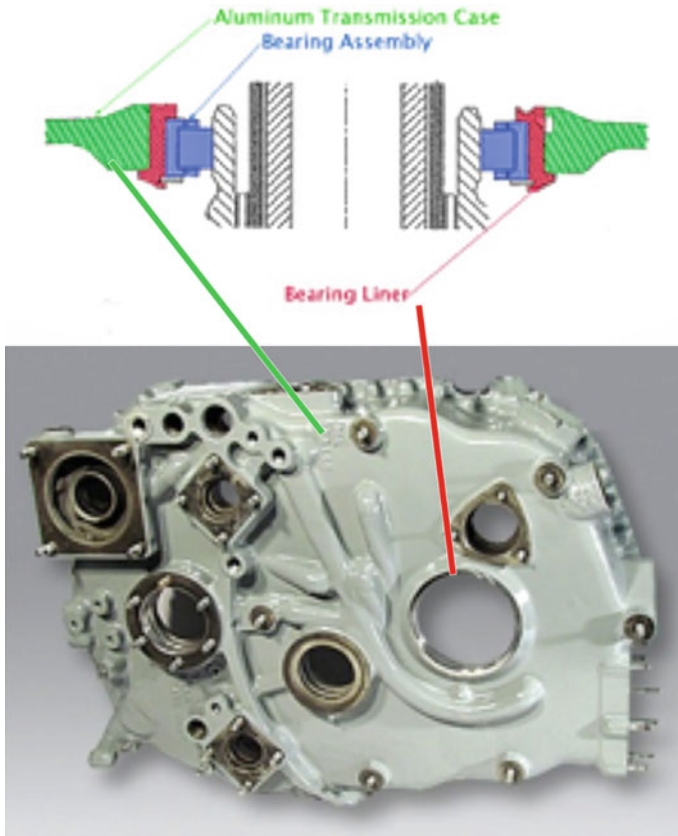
Drawing of a bearing liner and Photograph of bearing liners [11]
